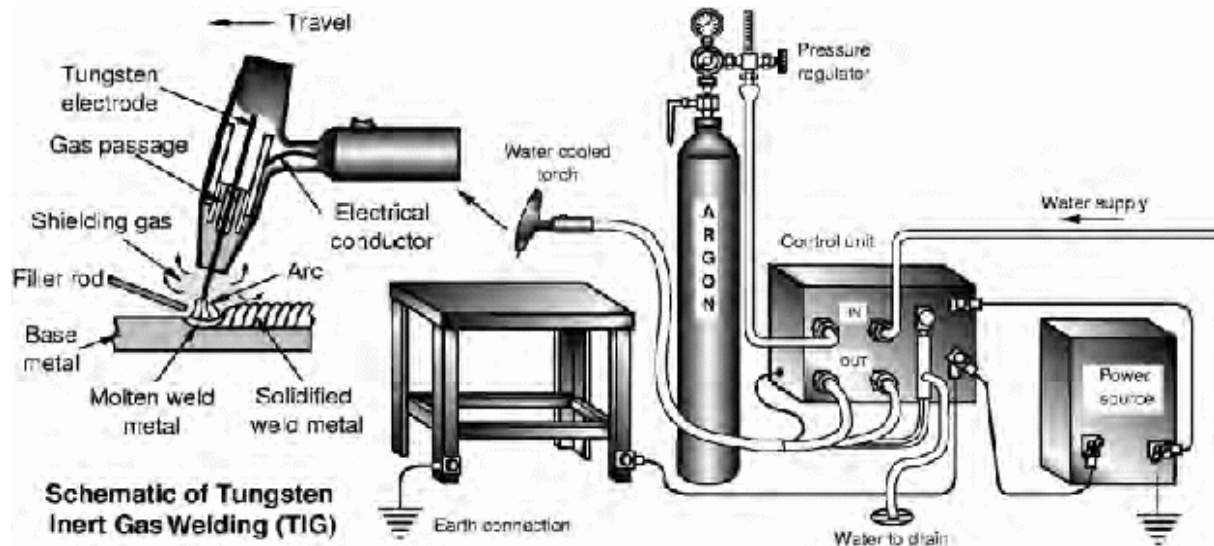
The Gas Tungsten Arc welding (GTAW) process
